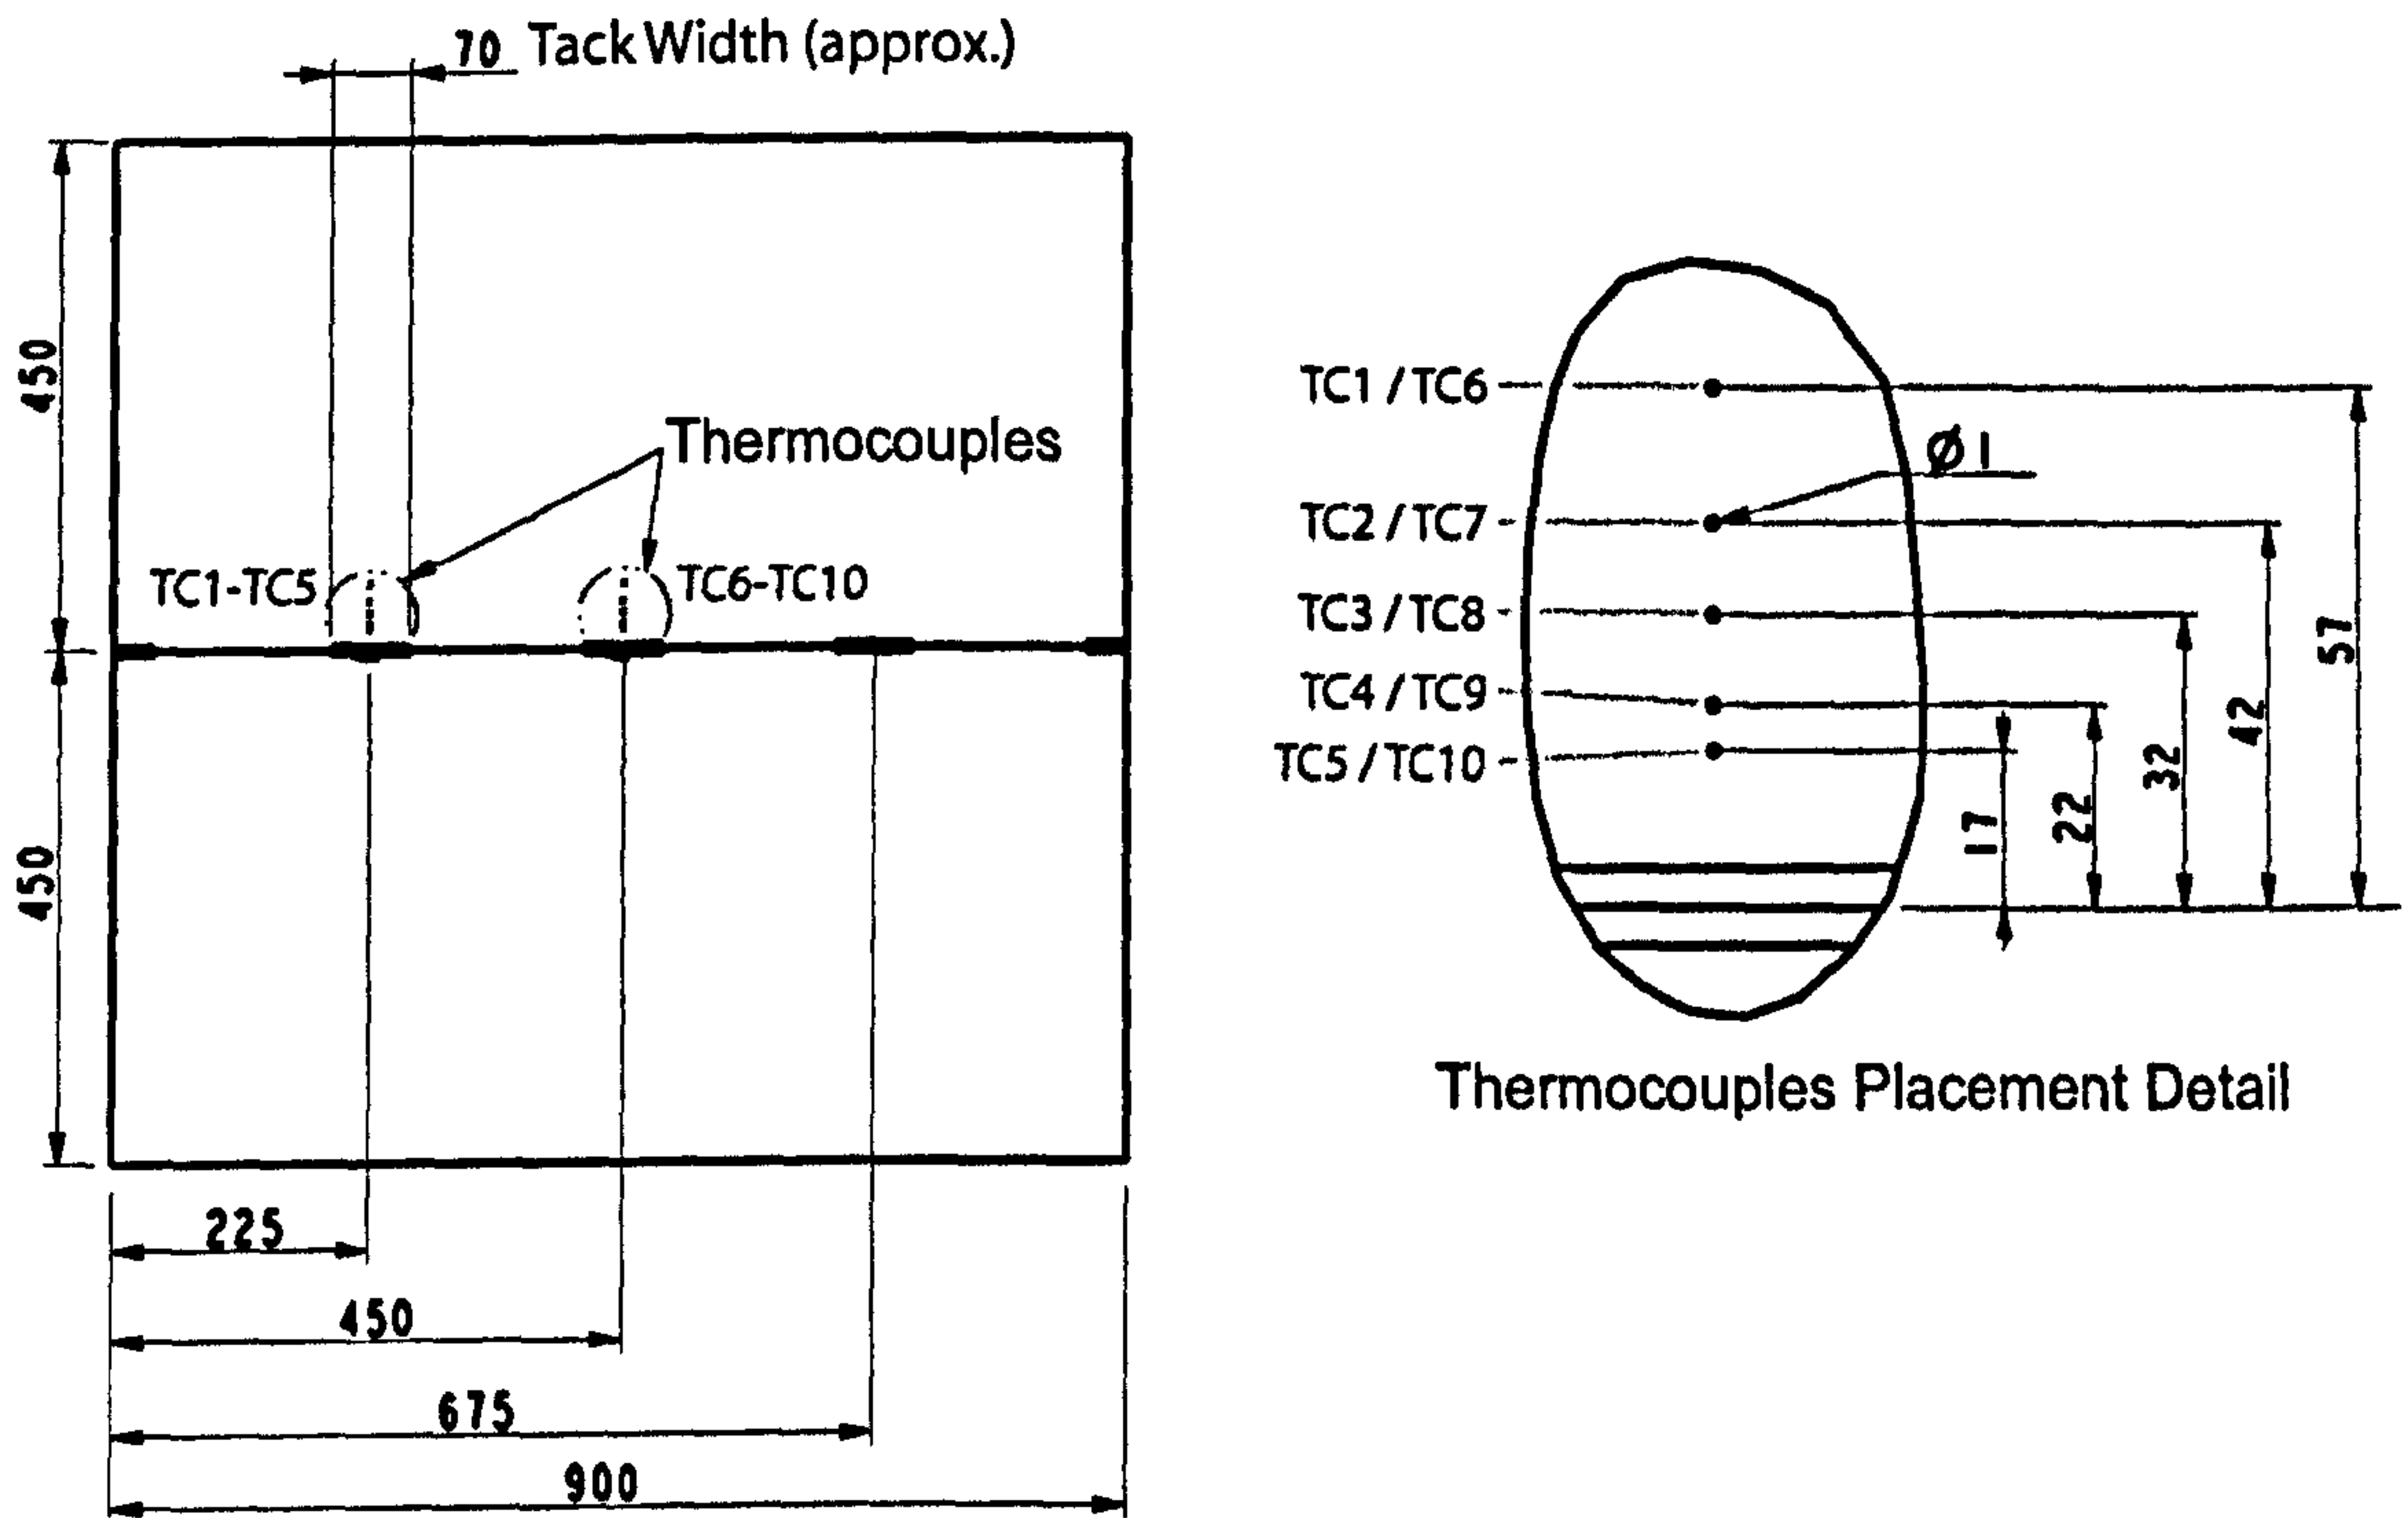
Thermocouple positions for the tack welding investigation
